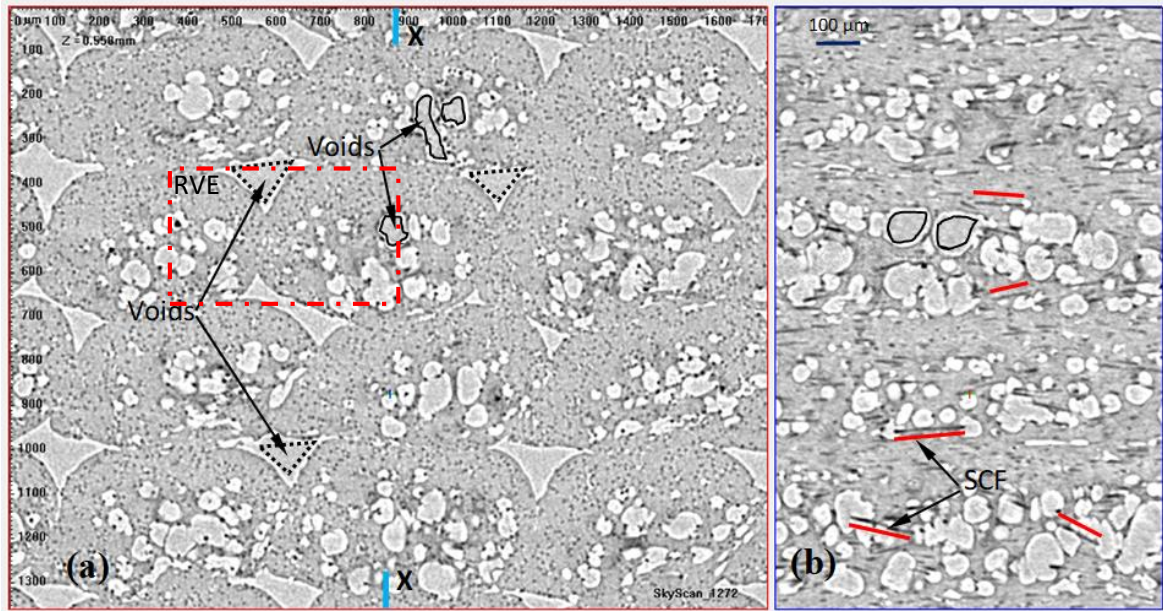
Thick-layered composite 3D printed part: (a) mesostructure; (b) cross-sectional view taken at X-X.
